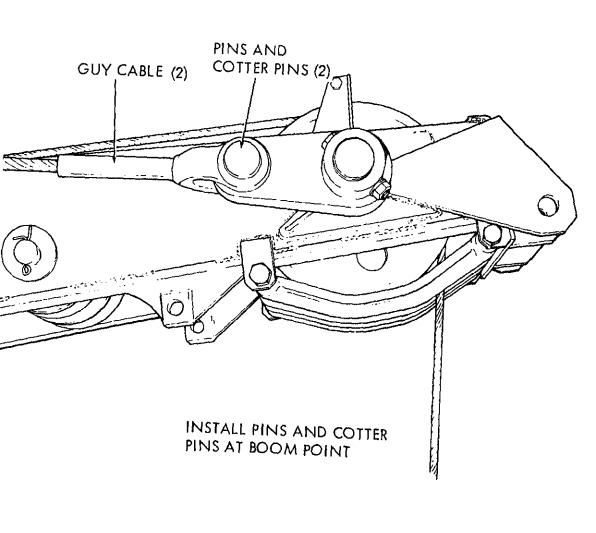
Guy cables, upper spreader to boom point, installation,
